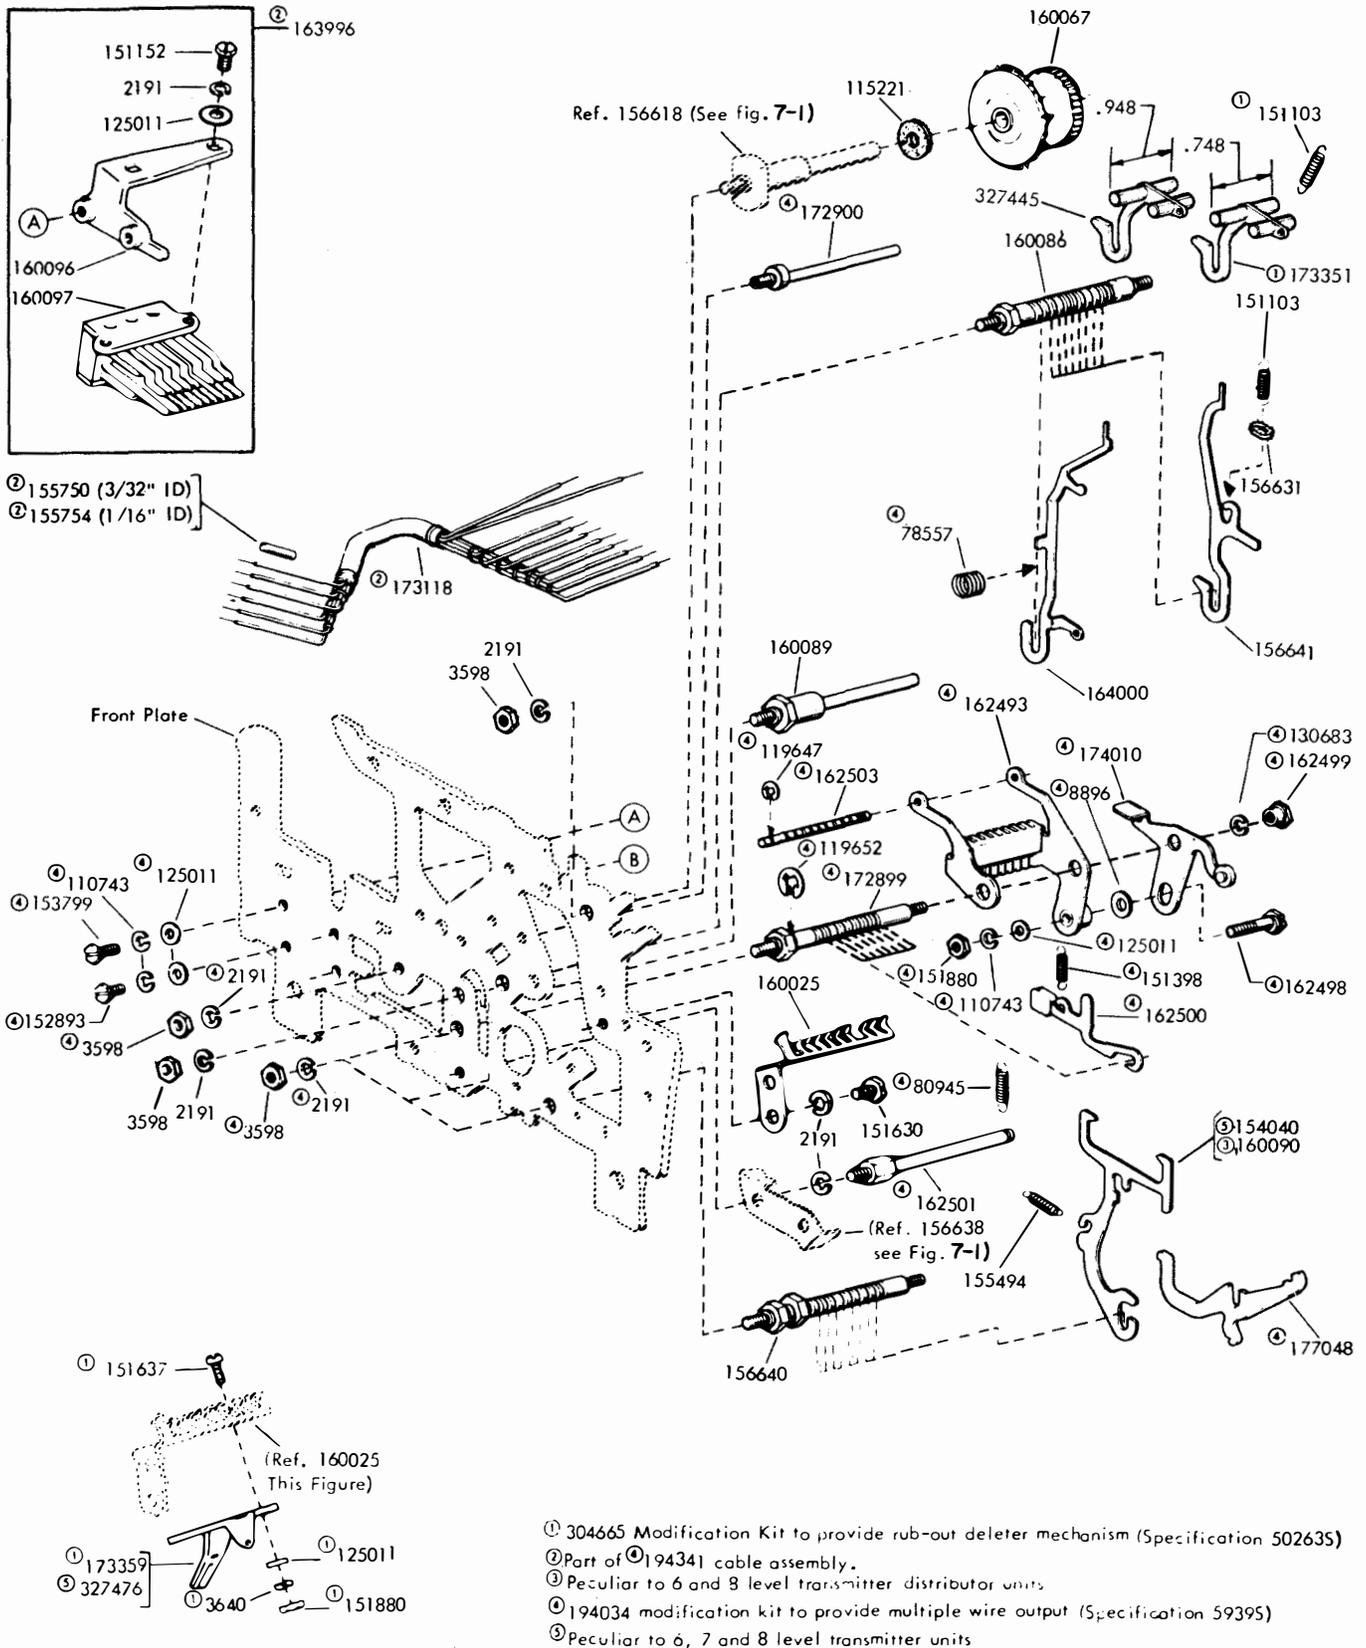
Front Plate Mechanism (6, 7, and 8 Level Units)
